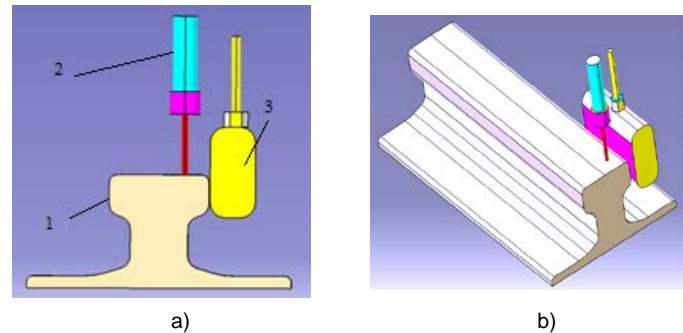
a) front view; b) isometric view; 1- rail; 2- welding head; 3 -skid.
